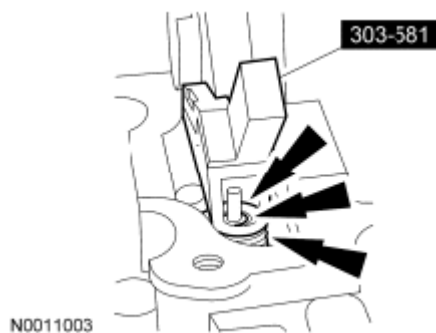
Locating Valve Spring Retainer And Retainer Keys
